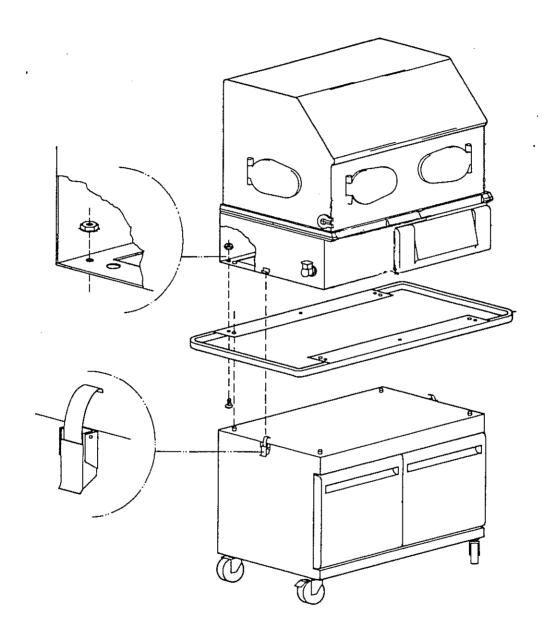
ASSEMBLY, INCUBATOR MOUNTED ON STANDARD CABINET STAND
